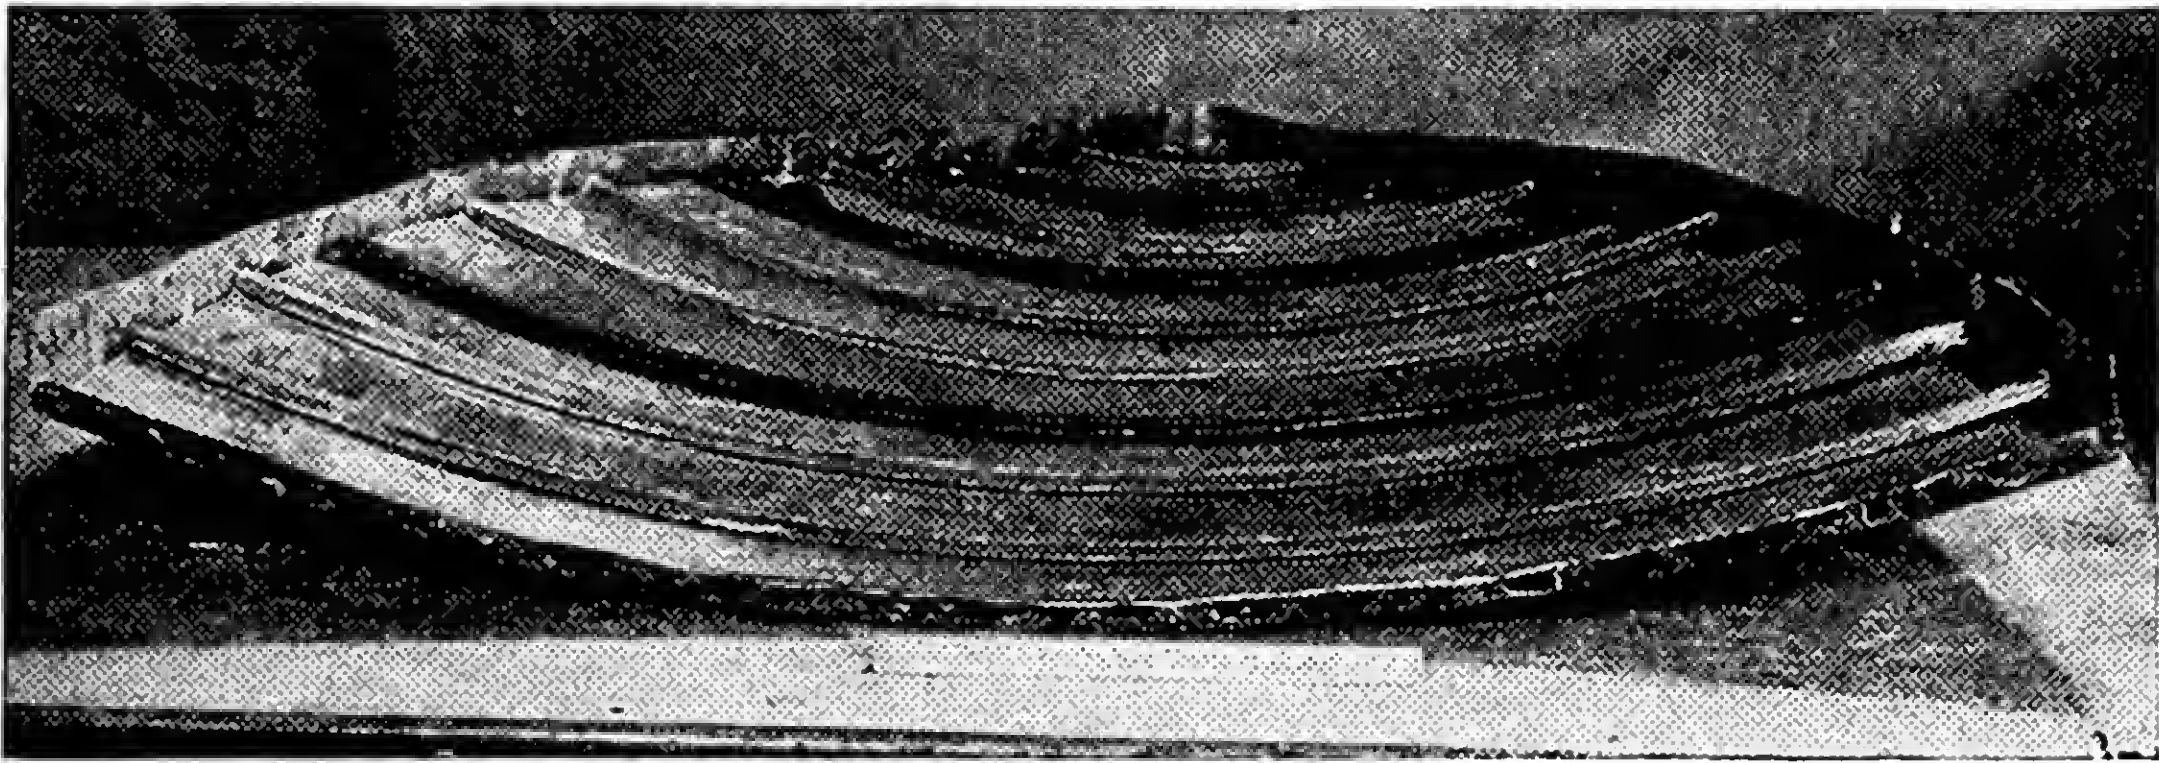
Laminating Balsa ribs for boat deck reinforcement.
